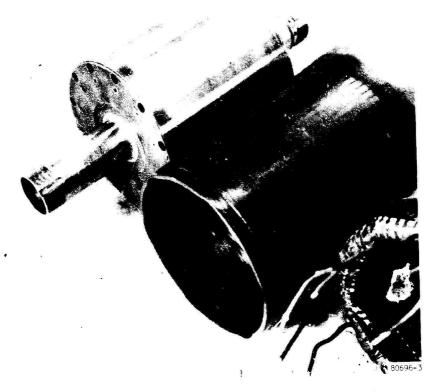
Rotor Assembly, Bore Seal, and Main Stator After Quick-Disconnect Failure
